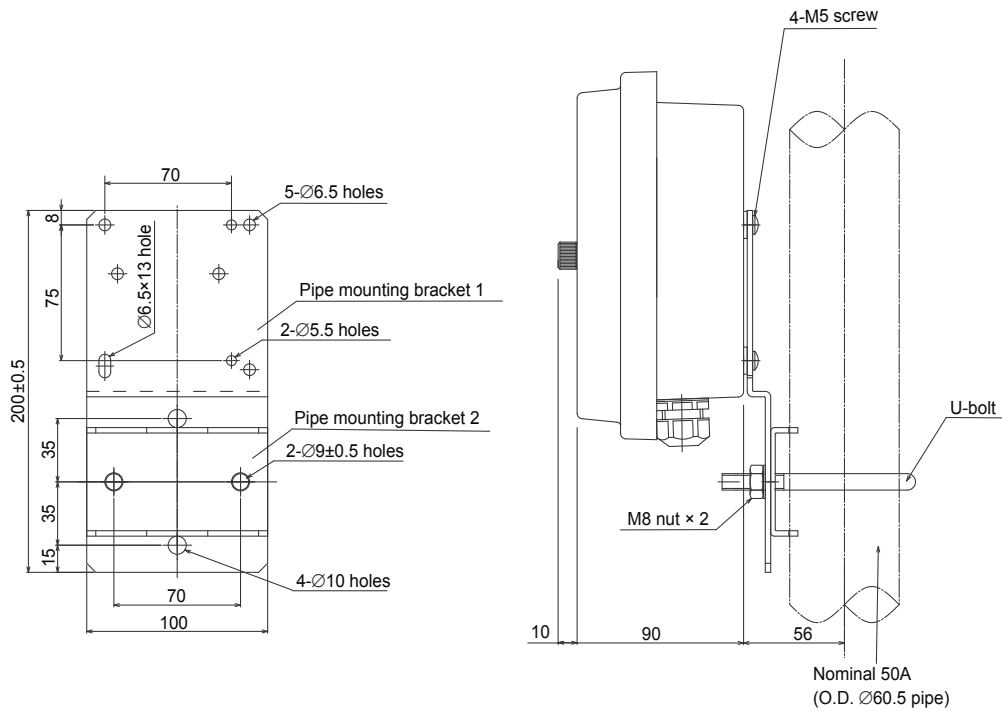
External View and Dimensions of Pipe Mounting Bracket
